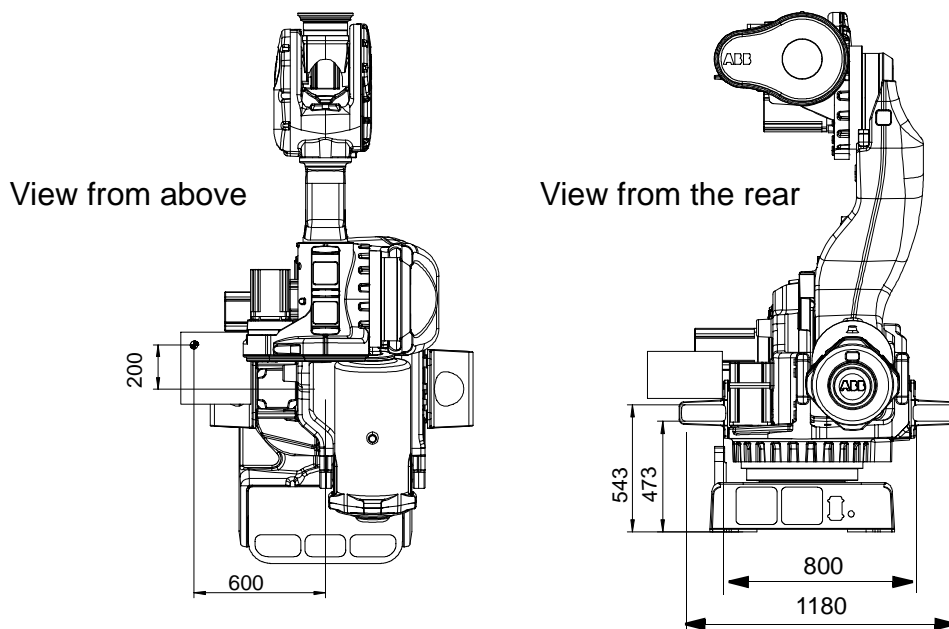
Extra load on the frame of IRB 7600 (dimensions in mm).
